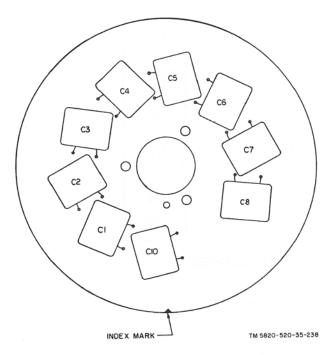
Rotor board assembly 1A12A32, parts location diagram.
